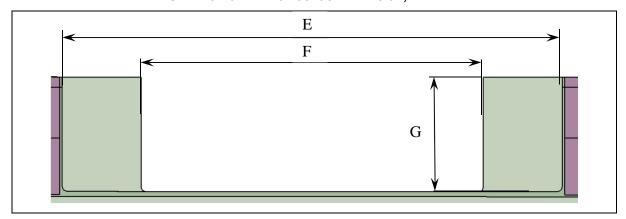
TWO-POINT LATCH CUTOUT, HANDLE
